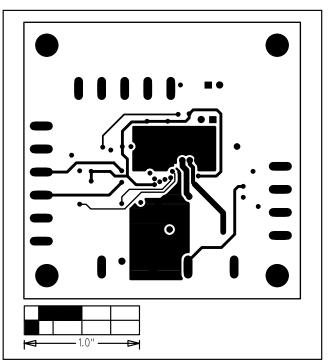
MAX8739 EV Kit PC Board Layout—Solder Side
